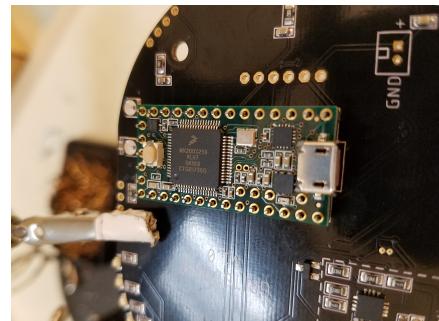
The parts needed to solder header pins to the Teensy 3.2 microcontroller.
